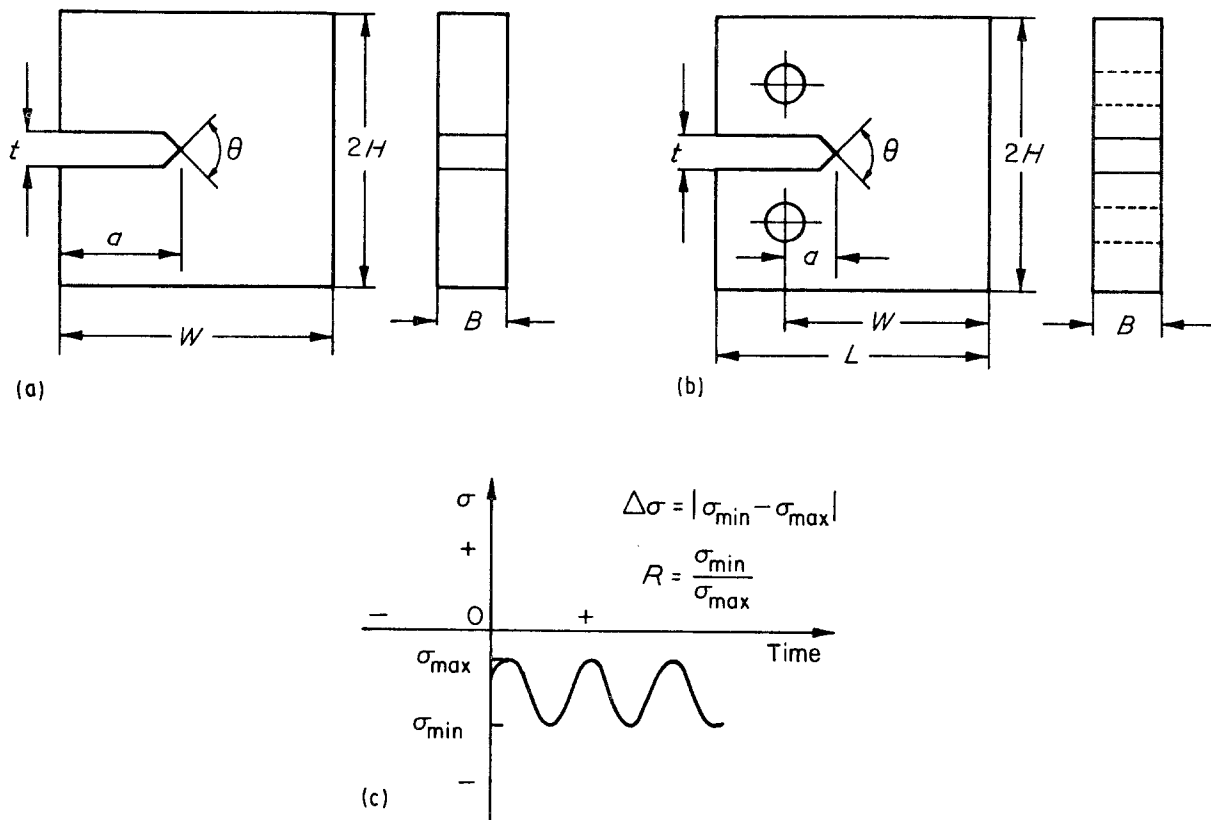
Schematic drawing of geometry and dimensions of (a) SEN specimen, (b) compact specimen; (c) nomenclature associated with the mechanical load variables for compression fatigue.
